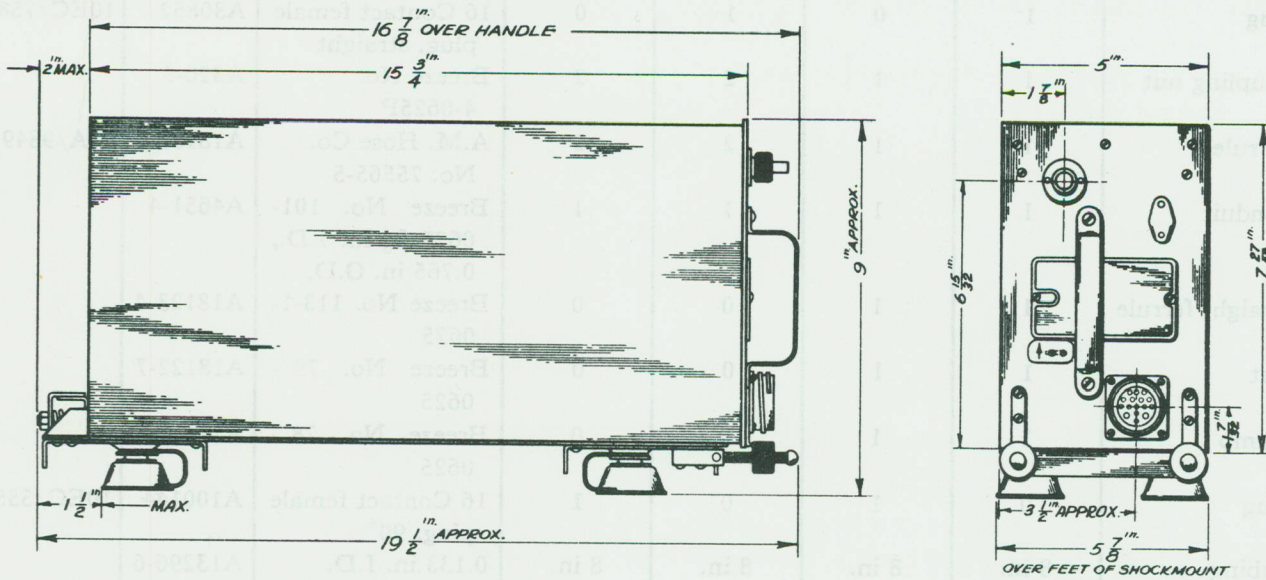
Outline Dimensions of MN-53B Marker Receiver Mounted on Type MR-64A Shockmount
